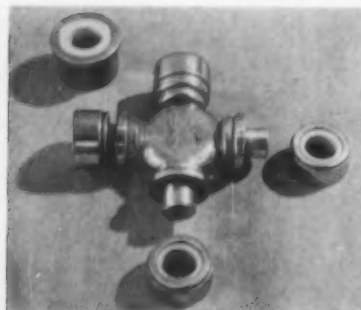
Bushings of automobile universal joint are fabricated nylon extrusions
